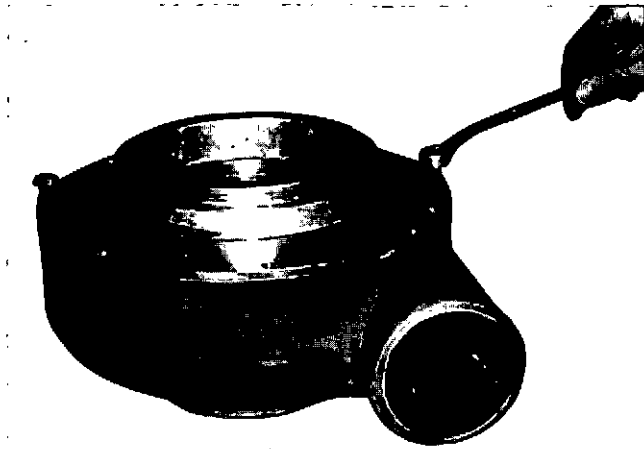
, (VTST29). Removing the diffuser plate from the compressor housing
